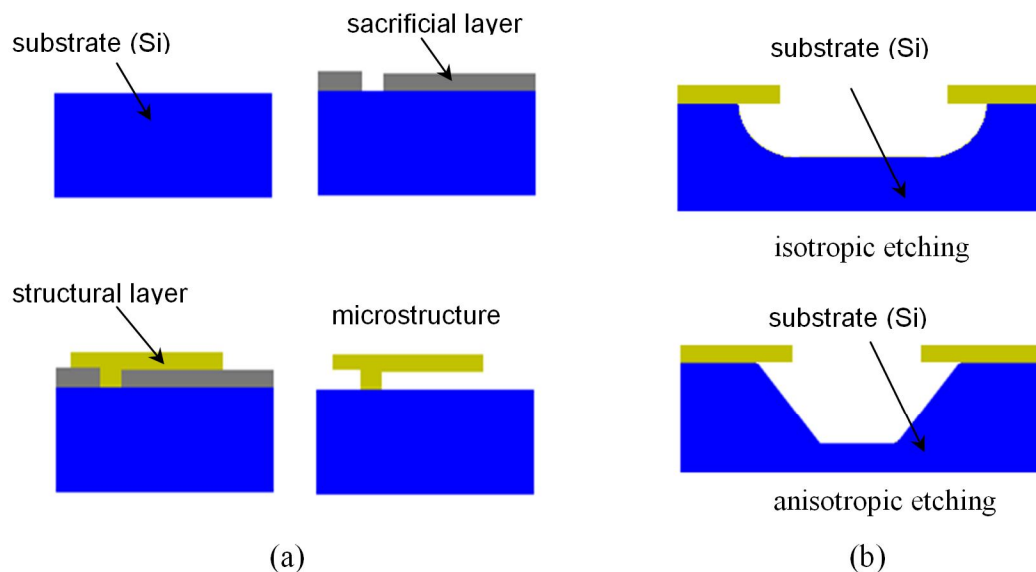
Micromachining techniques: (a) Surface micromachining steps and (b) Bulk micromachining.
